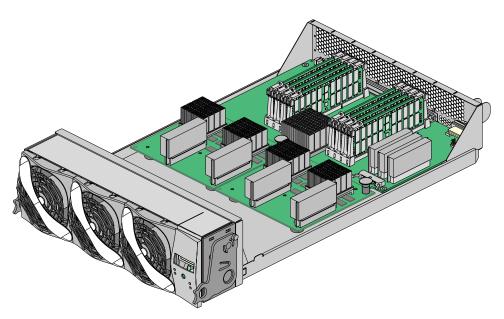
C-brick Logic Carrier Assembly - Front View
